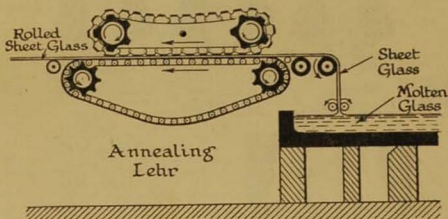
The Libbey-Owens Automatic Sheet Glass Machine.
